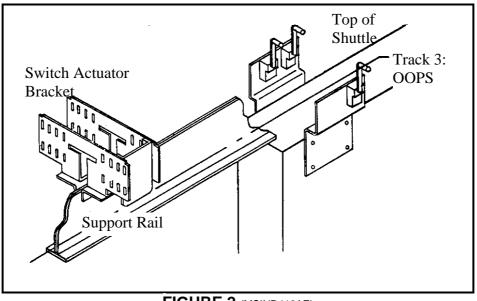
(MSIND416AE) Example: Track 3 Used To Align Oops Switch
